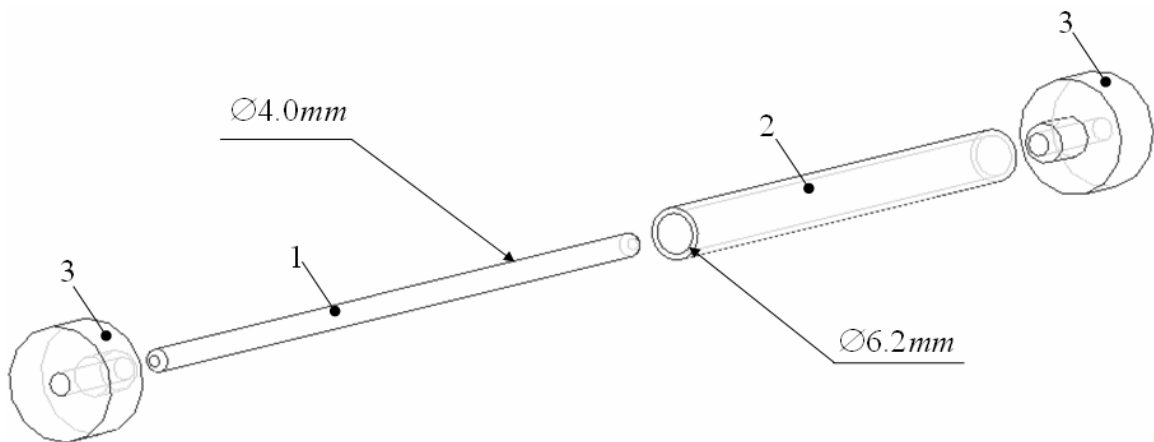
Three parts mold to make the tubular graft (1. Inner stainless steel rod; 2. Outer stainless steel cylinder; 3. Nylon screw fittings to center and maintain the 1. within 2.)
